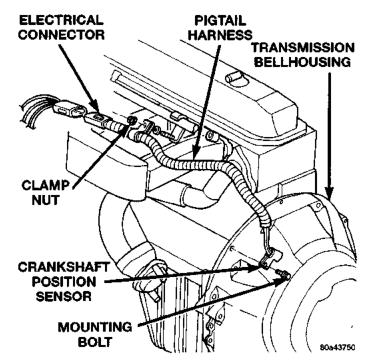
Crankshaft Position Sensor—4.0L 6-Cyl. Engine—Auto. Trans.
